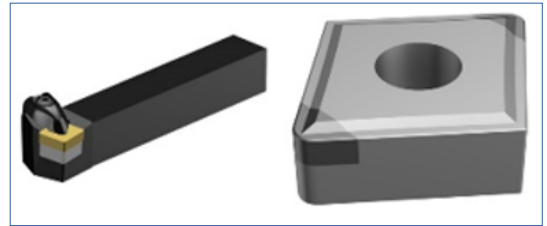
DCKNR 2020K 12 turning lathe blade holder and CNGM12041 2F-HGR 7125 blade. [8, 9]
